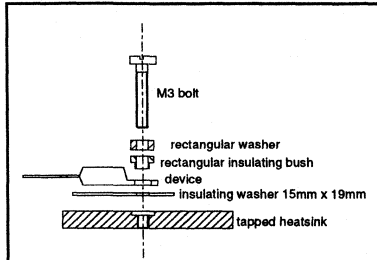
Insulated screw mounting with rectangular washer into tapped heatsink.
